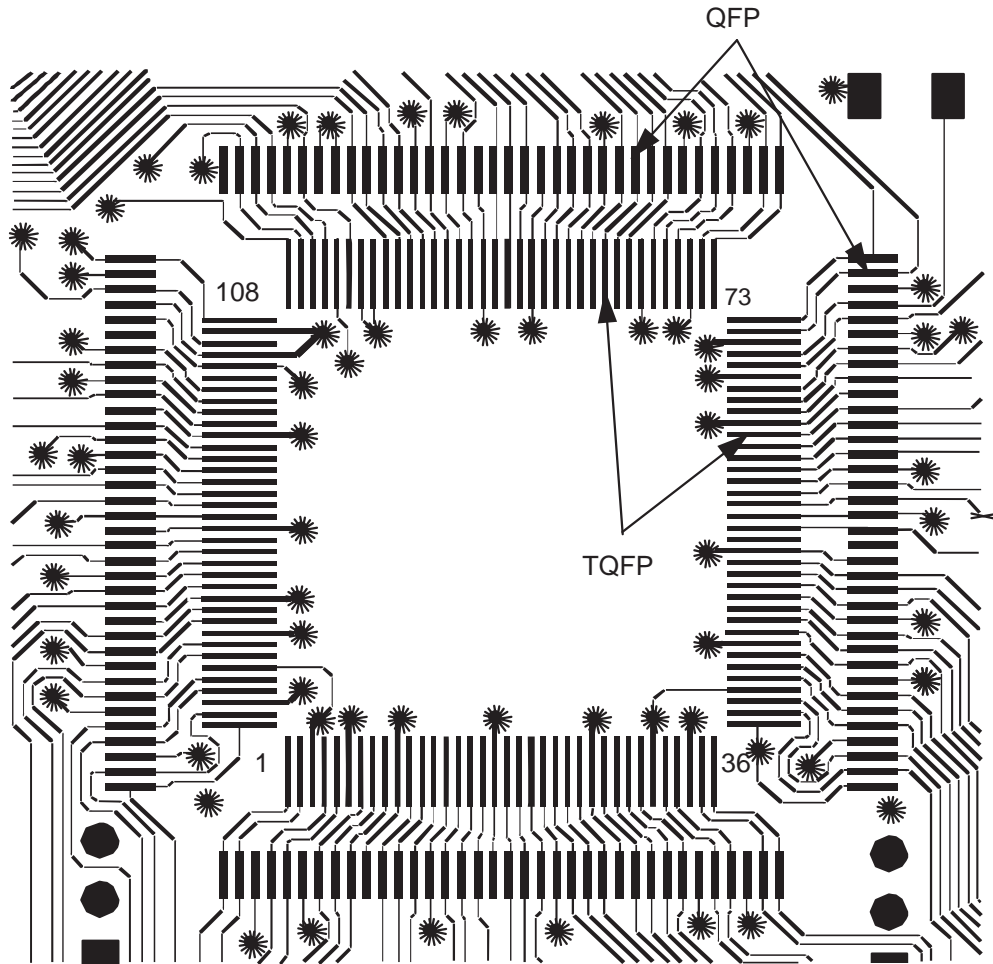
Dual-Footprint Arrangement for QFP and TQFP Package Styles
